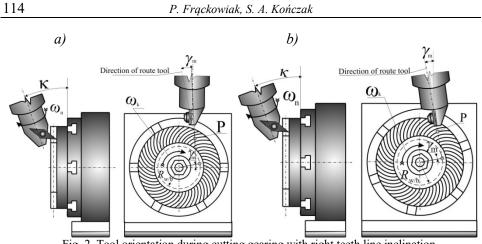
Tool orientation during cutting gearing with right teeth line inclination, R_b - theoretical rolling radius, R_w - radius of generation a circle tooth line of face-gear, ω_k rotational speed of face gea, ω_n - rotational speed of tools, γ_m - twist angle of the spindle, κ inclination angle of the spindle to face gear, P - settings point tools
